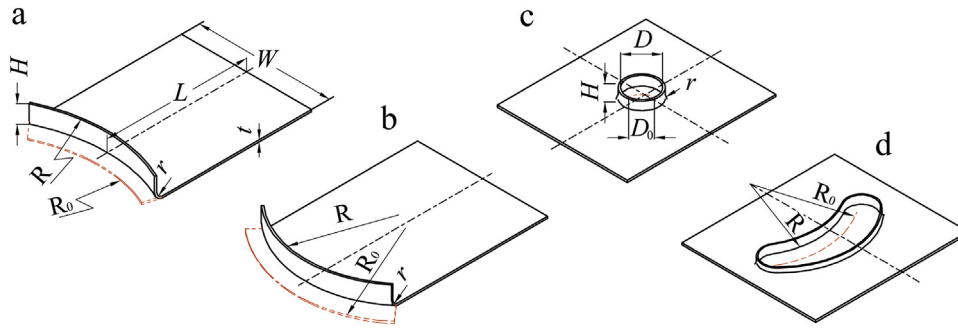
Typical flanged shapes on planar blank: (a) open stretch flanging; (b) open shrink flanging; (c) round-hole-flanging; and (d) profiled-hole flanging.
